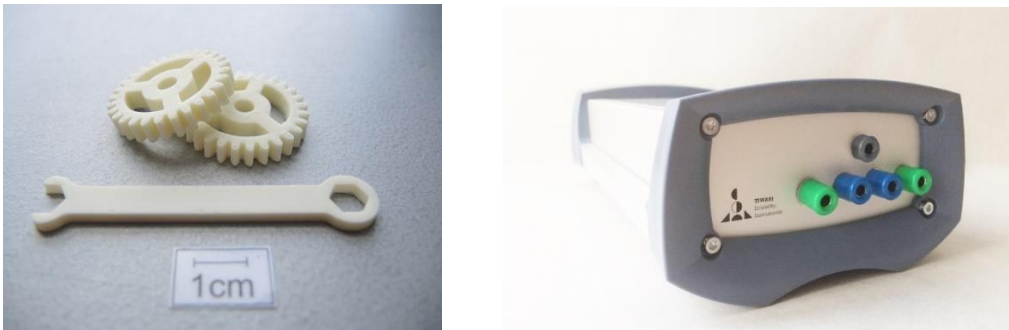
D-printed parts out of ceramics (left) & SHIEL3D Measurement instrument (right)
